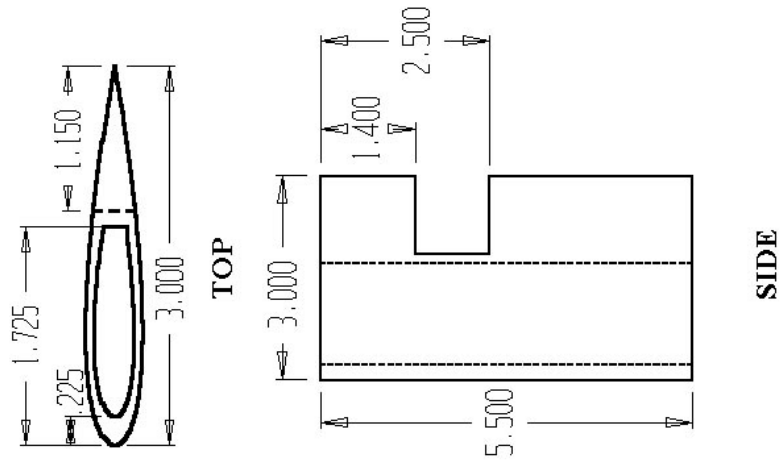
Modified IGV Design Step 4—Notch Cut-out
